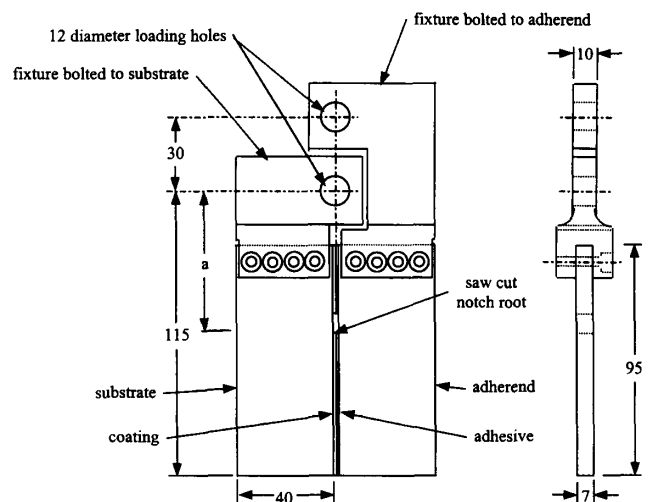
Mode II test specimen and attached loading fixtures. All dimensions are in millimetres.
